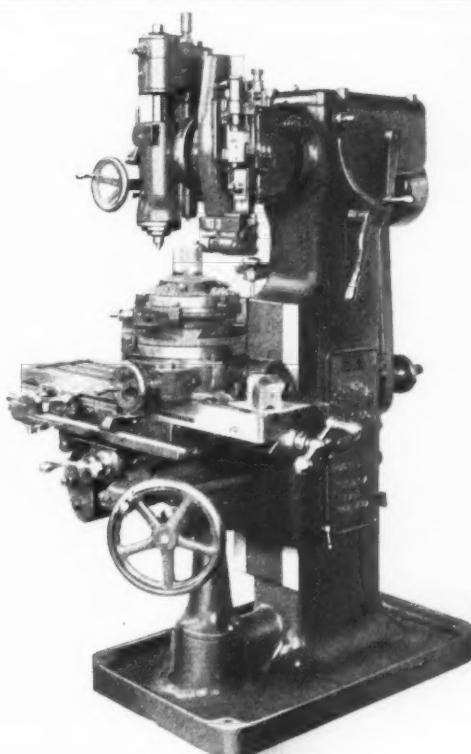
Cochrane-Bly Improved Type Miller-shaper
